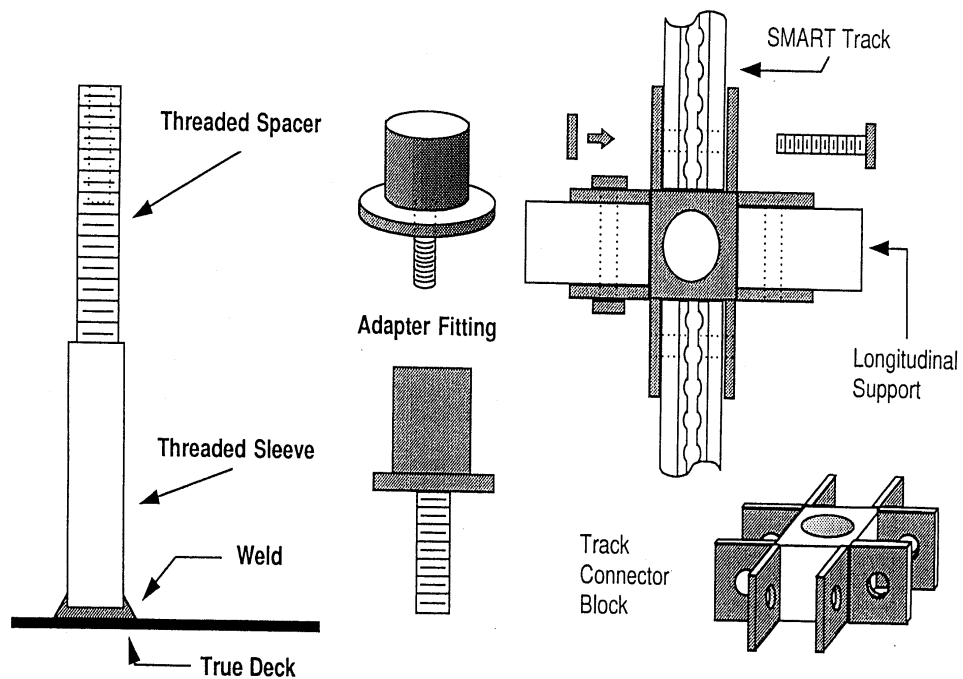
DETAIL OF HEAVYWEIGHT MILSPEC "HARD TRACK" ASSEMBLY
